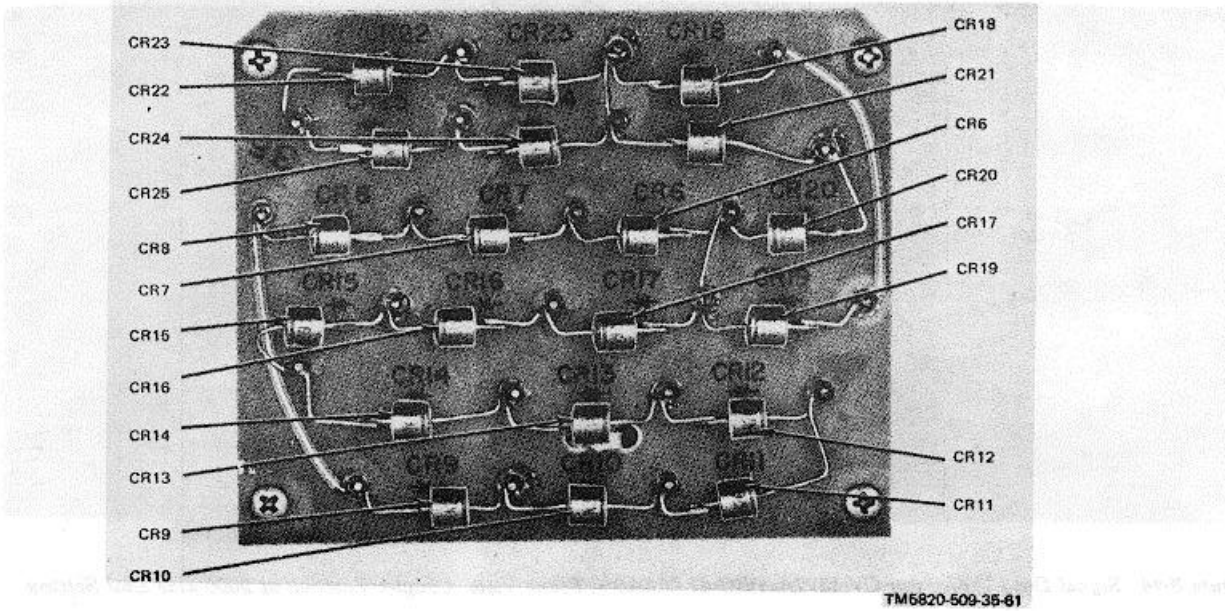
Power Supply PP-3581/PRC-47 (A8A5), Subassembly no. 1, Front View
